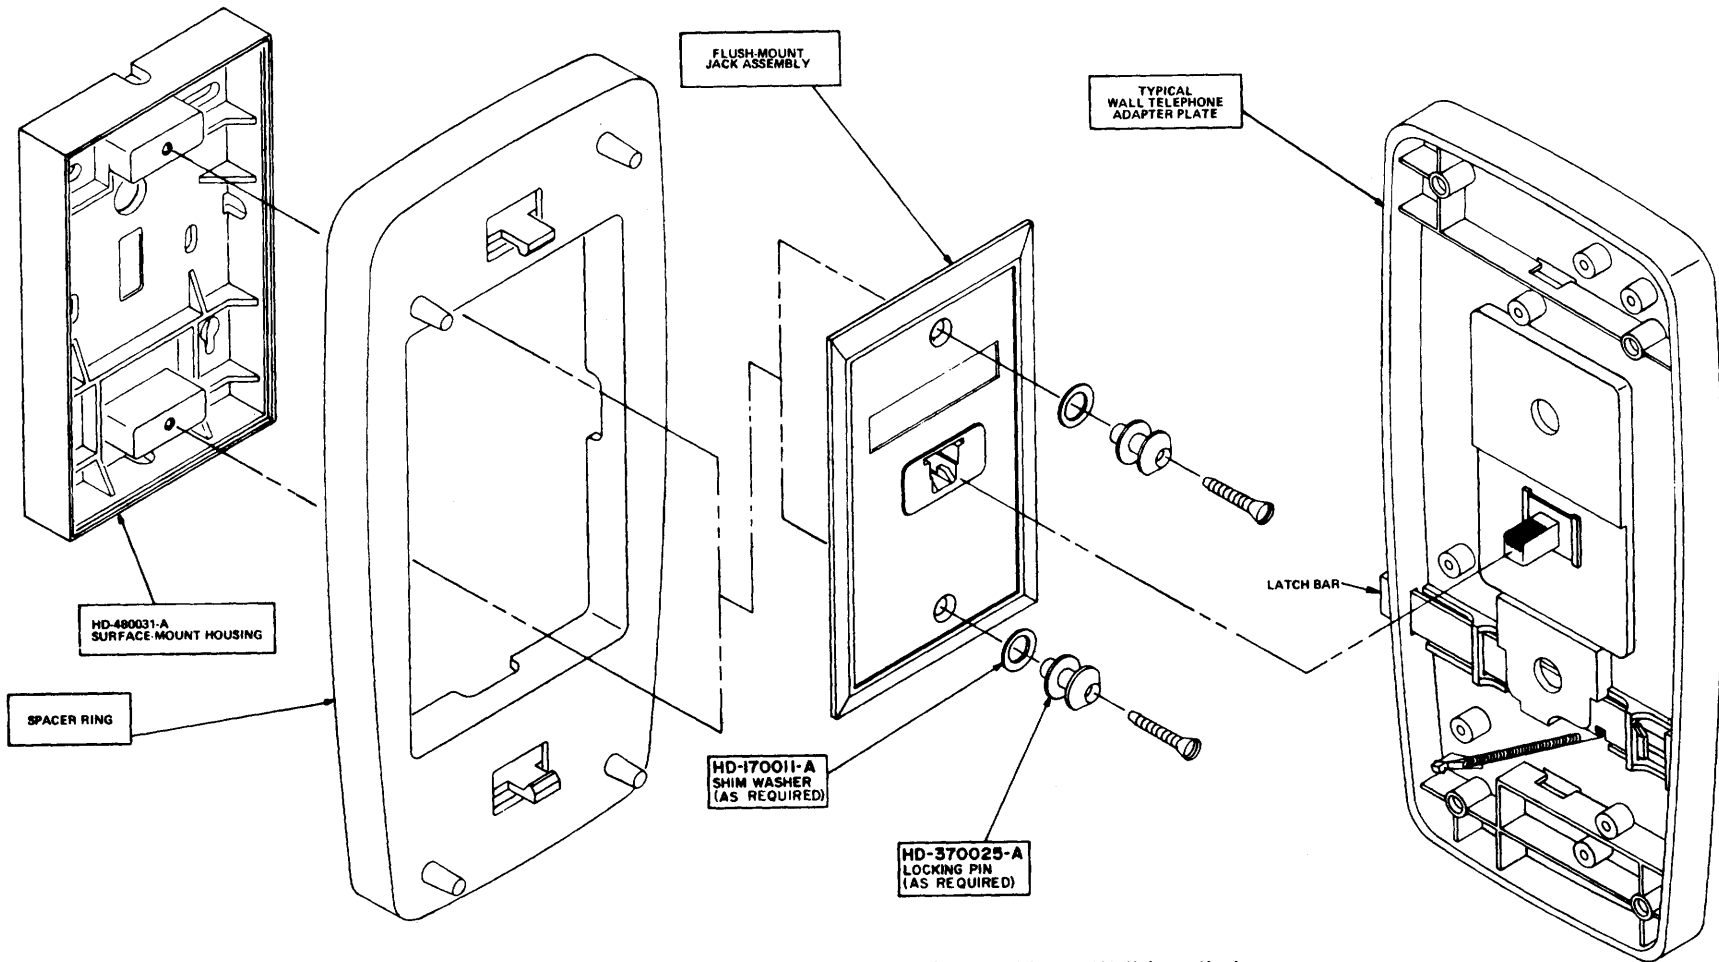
Mounting Arrangement for Surface-Mount Wall Installations.
